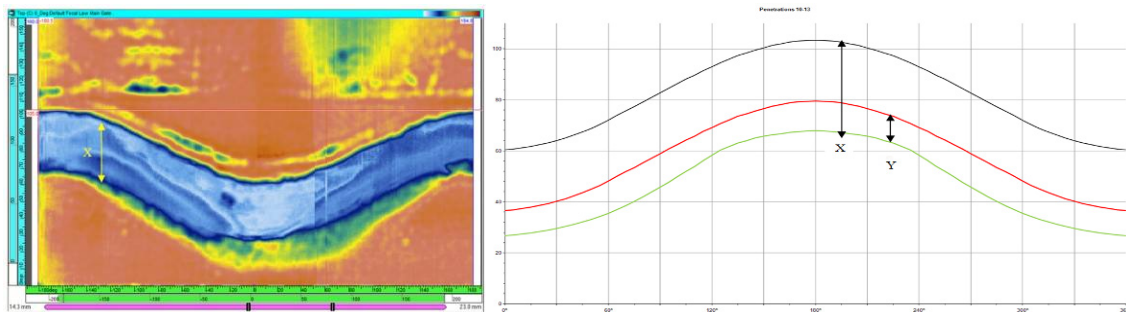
Typical J-Groove weld acquired by 0° UT probe and maximal allowable grinding height
